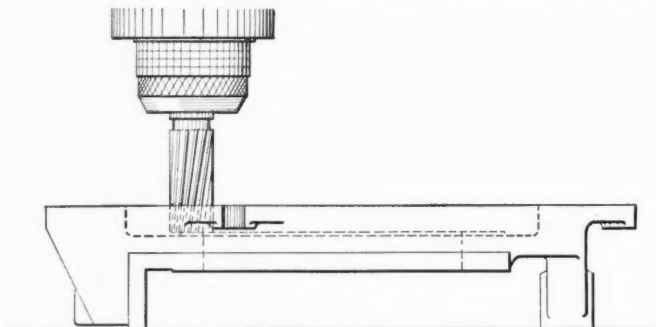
Milling Under Strap Strips with End Mill, using Vertical Spindle Machine.
